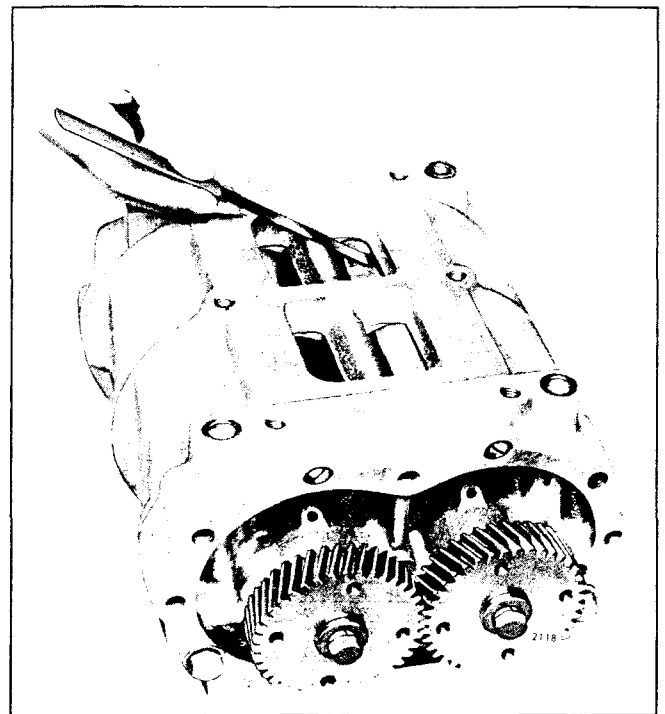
Measuring Rotor Lobe to Housing Clearance
